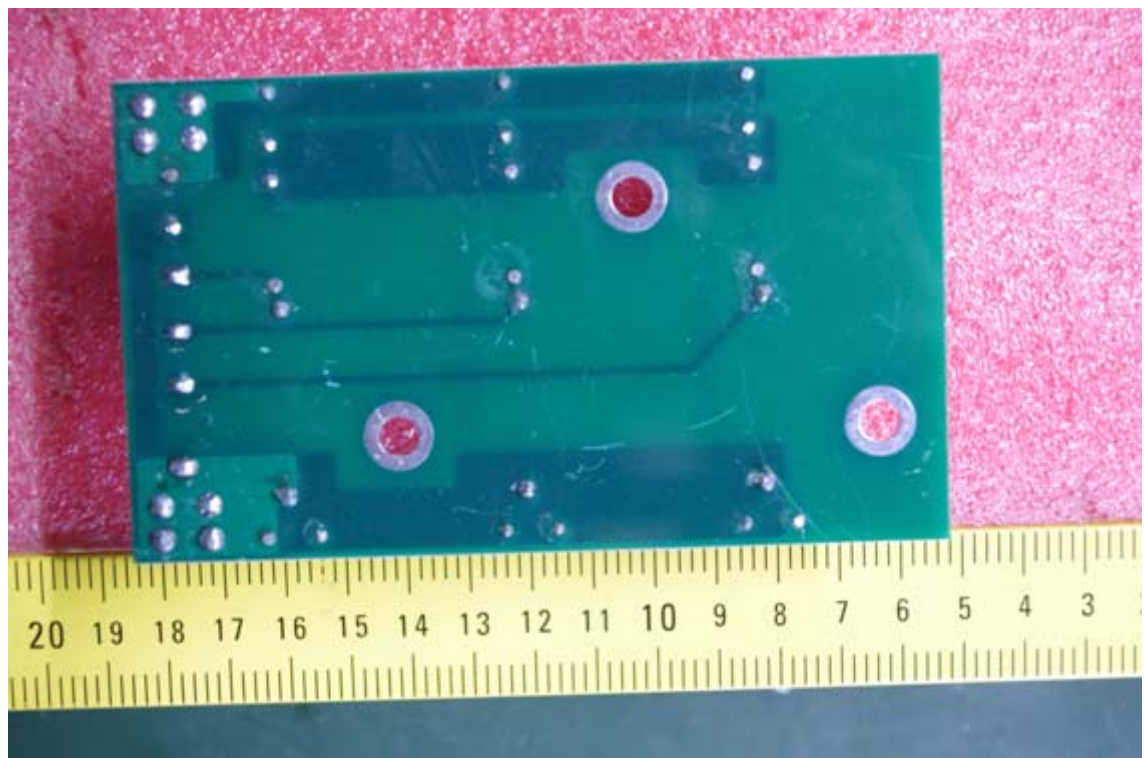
Board SNT\_PCB\_3320\_CR, traces side view
